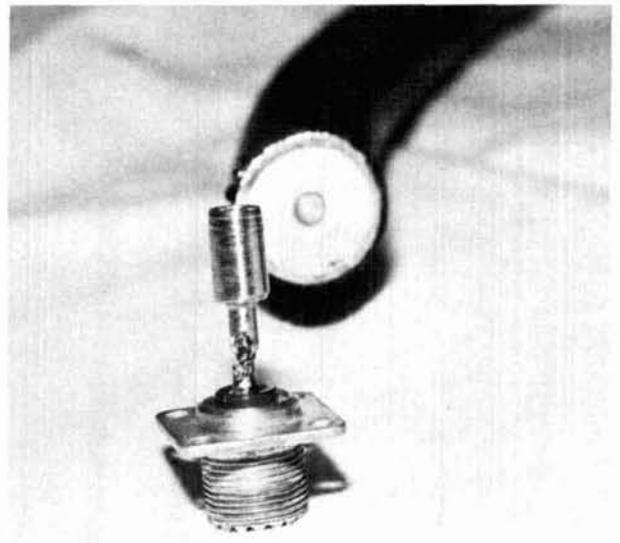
The inner assembly has been completed and prepared for insertion into the outer adapter.
